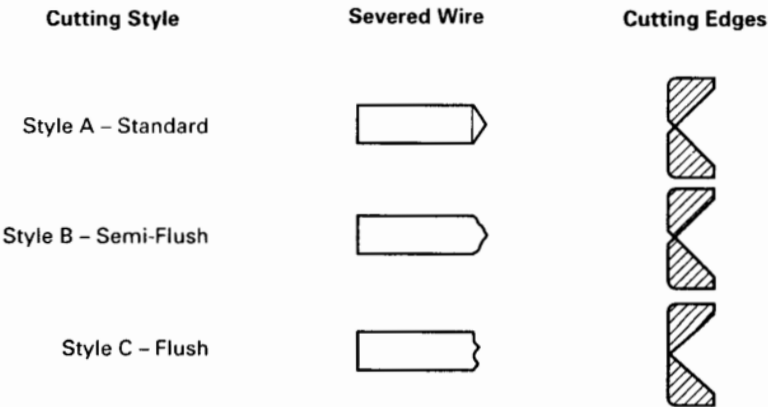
SEVERED WIRE STYLES WITH CUTTING EDGES CROSS SECTION
